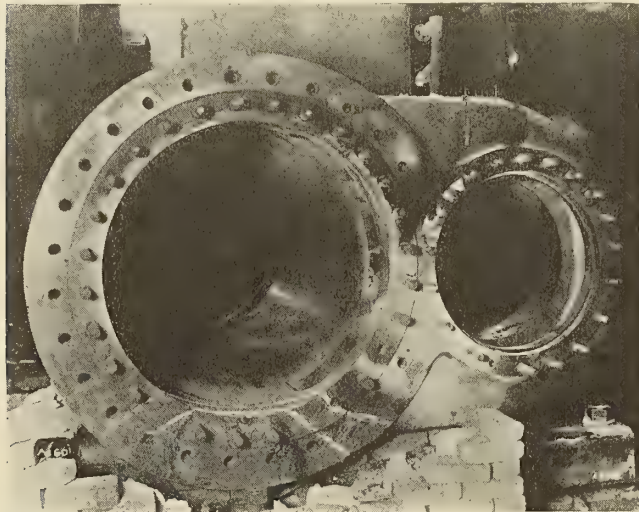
Flange Welded on 5-Ton High-Pressure Cylinder. Weld 4½ Feet Long, 3½ to 6 Inches Deep
